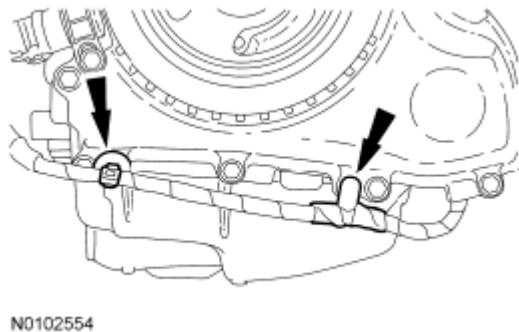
Locating Crankshaft Position (CKP) Sensor Wire Harness Retainers
